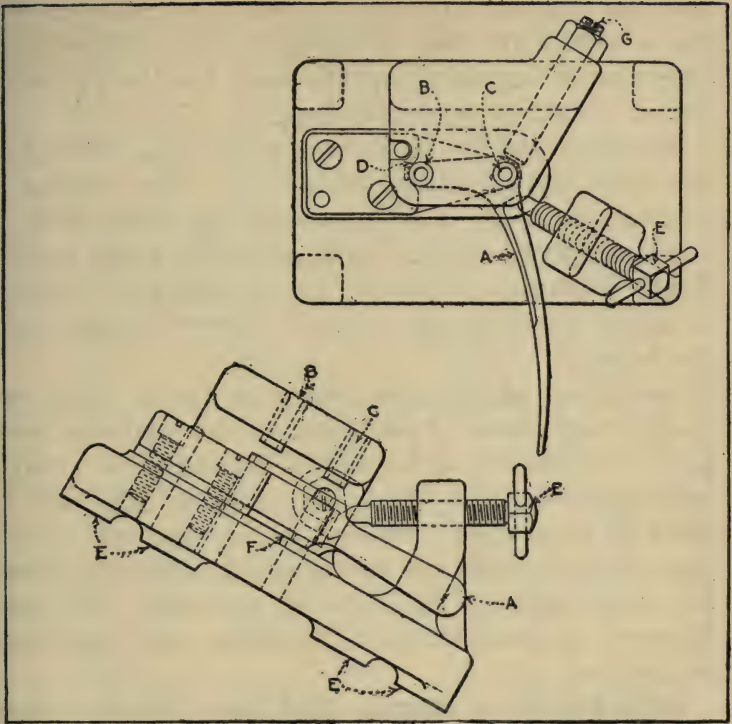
JIG FOR AN AUTOMOBILE HAND LEVER
